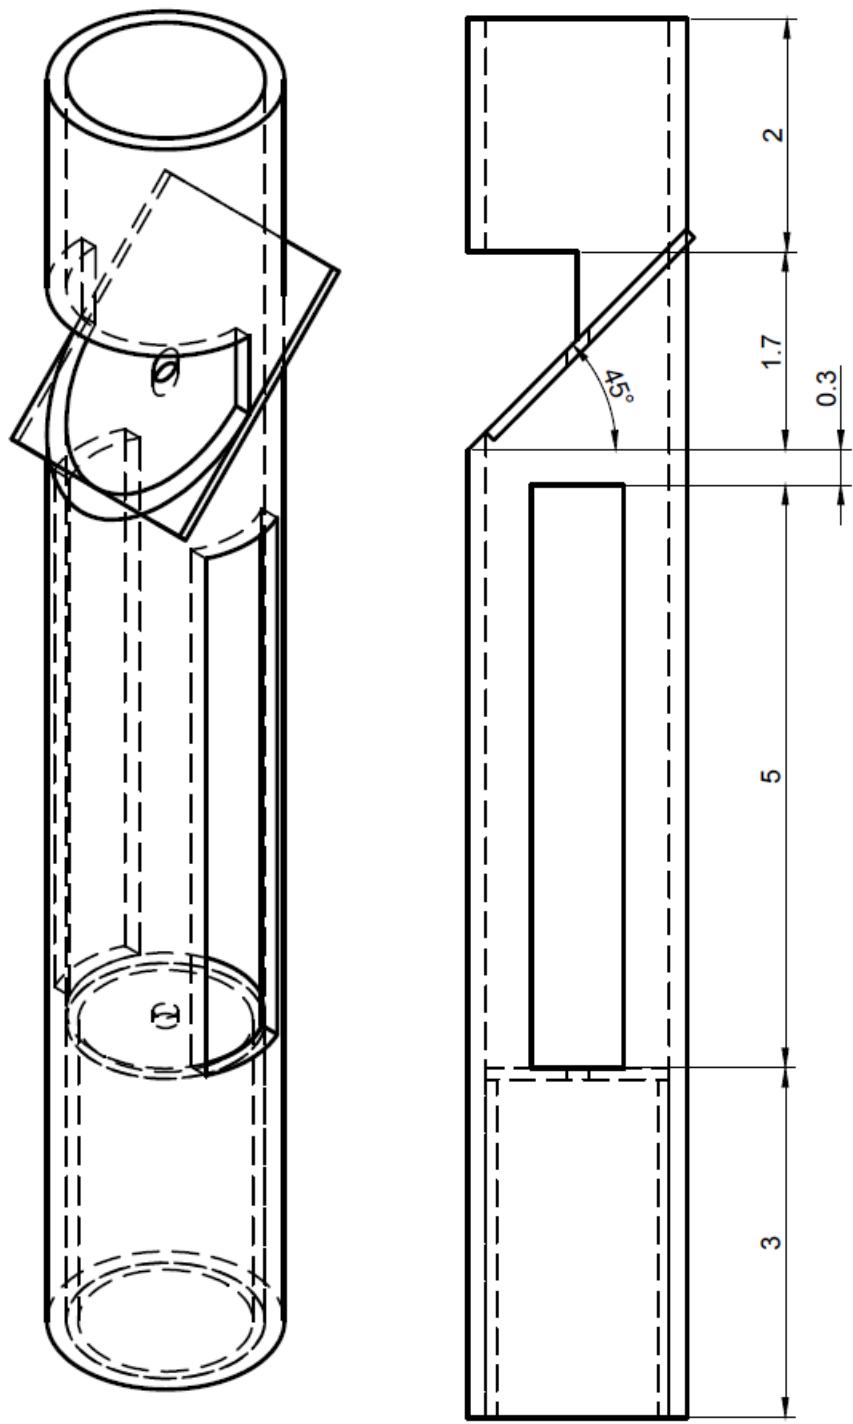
Final design for the spring manipulation system (dimensions in inches).
